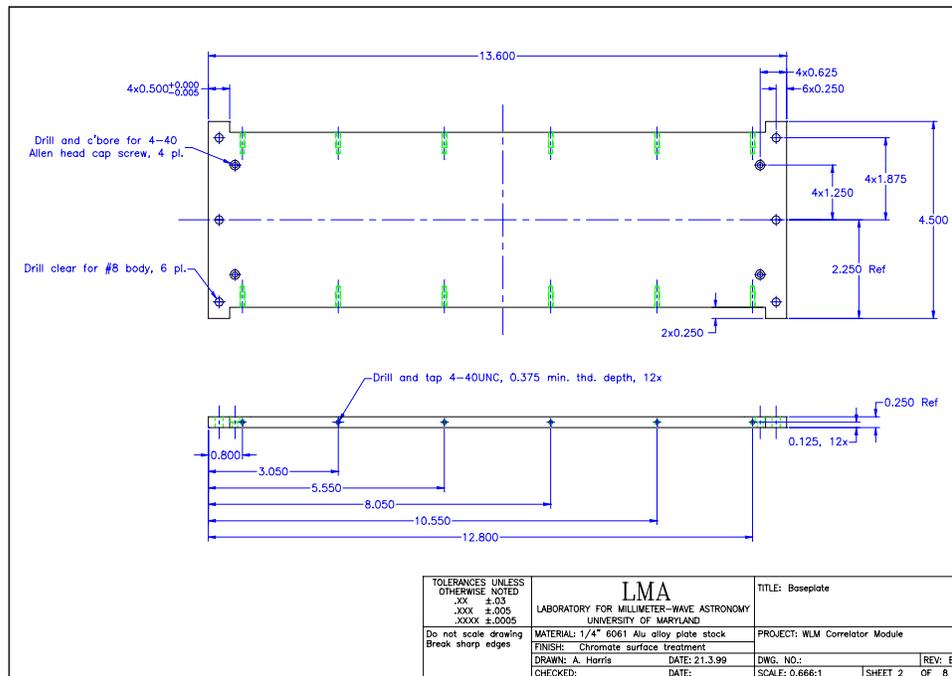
APHID baseplate with mounting hole dimensions. Mounting is with up to six #8 body screws through holes in baseplate. Baseplate also carries thermal flow from module.
